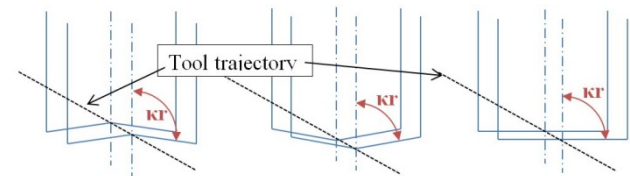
influence of tool cutting edge angle on the axial chip geometry
